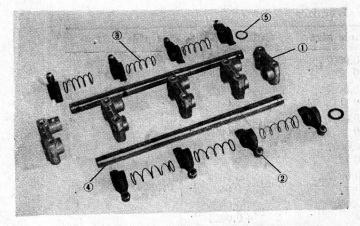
Disassembling the Rocker Arm Shaft Assembly
